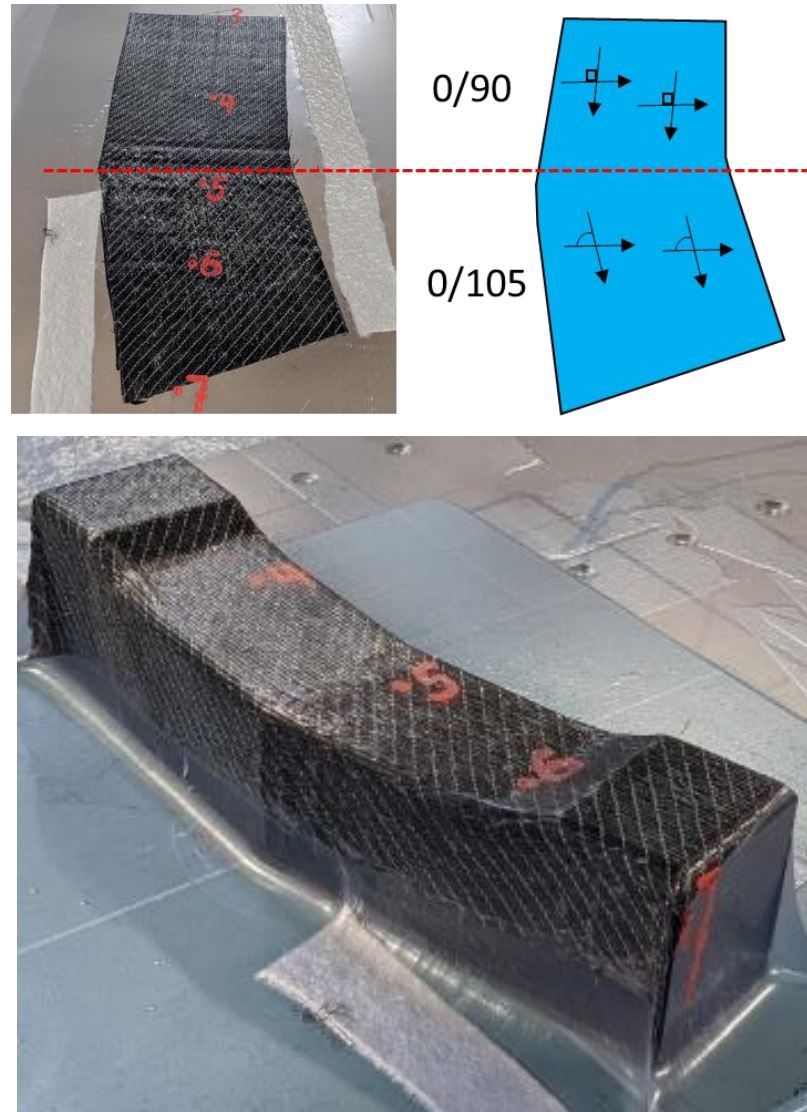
double diaphragm vacuum forming of pre-sheared ply.
